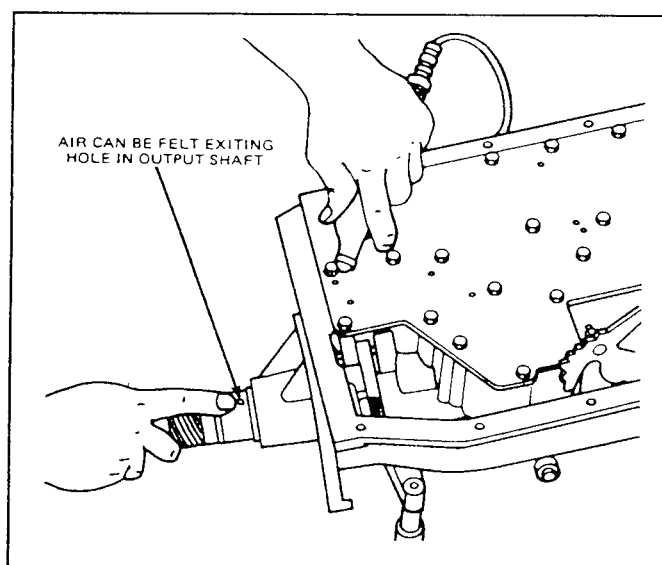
Air Pressure Test—Governor to Valve Body—AOD
